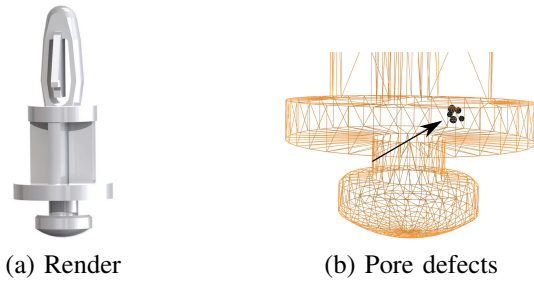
The PCB support sample: (a) shows a render of the CAD model and (b) shows the internal pore-like defects.
